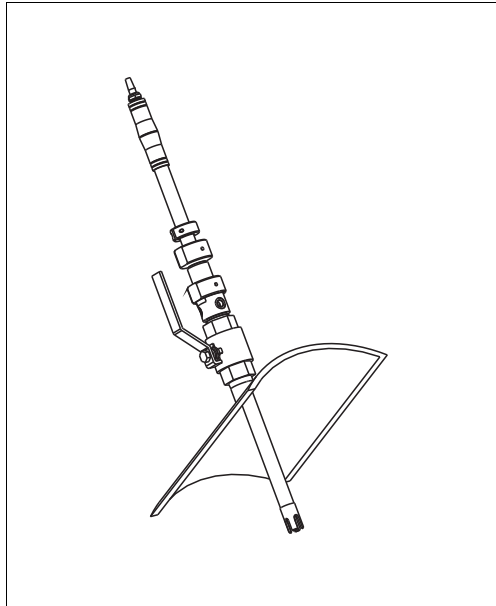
Assembly in inserted position = measuring mode (ball valve open)
